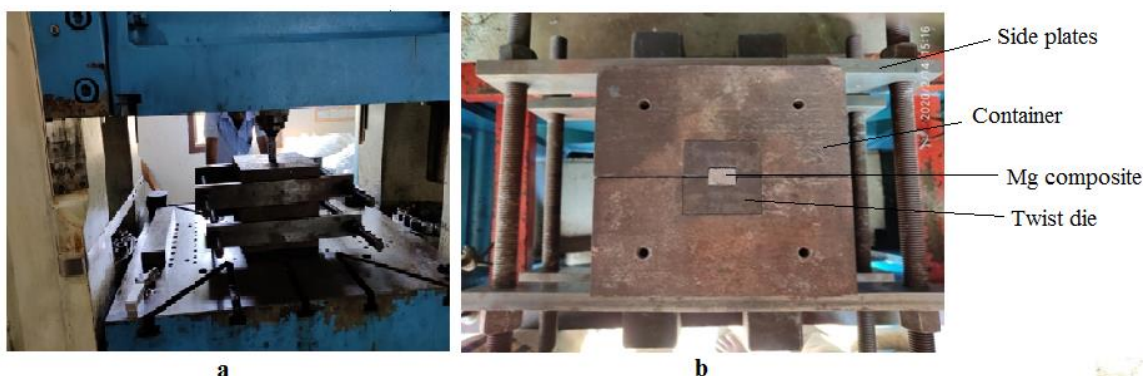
Experimental setup (a) During extrusion (b) Die and container assembly.
